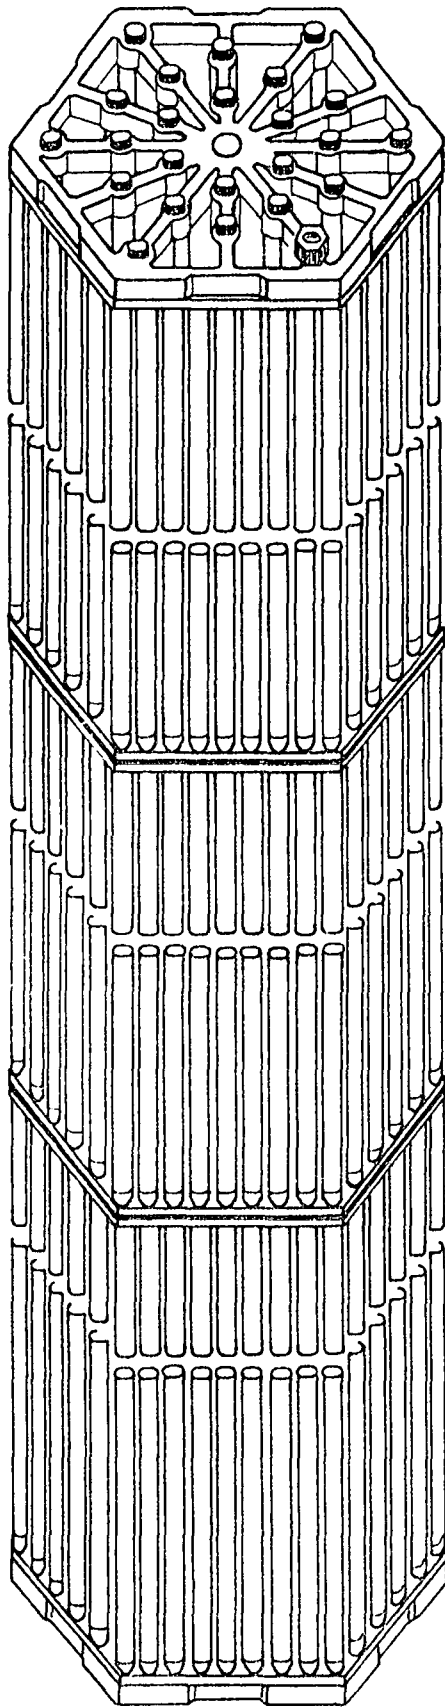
CAREM 15 - Fuel Assembly (Version C)
